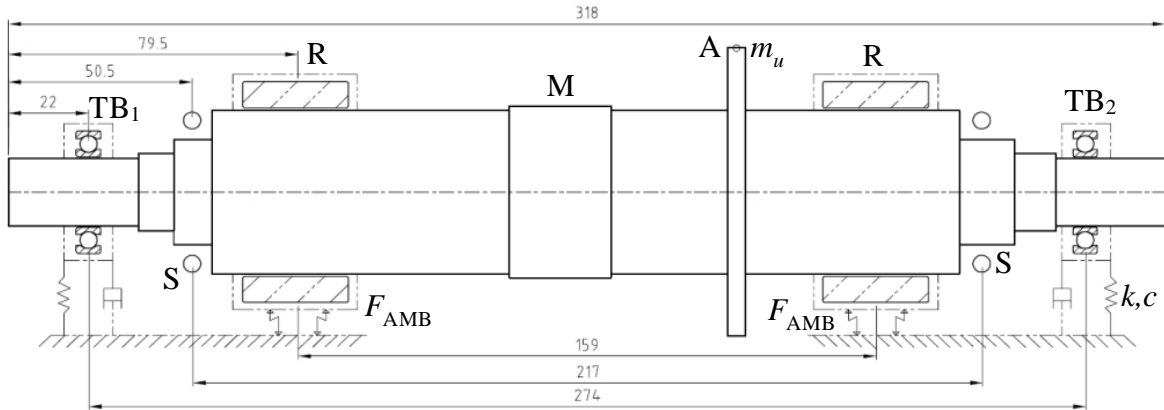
The analysed system of AMB-supported electric motor with touchdown bearings and rotor I [mm].
